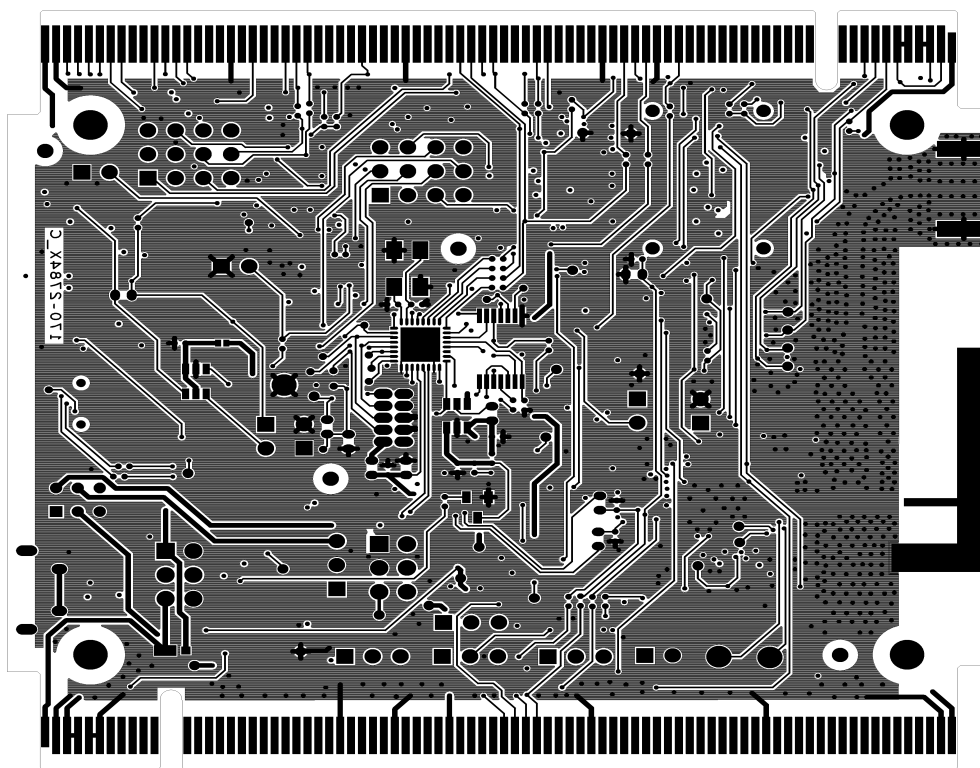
TWR-KW24D512 Reference Board PCB Layout (Bottom View)
